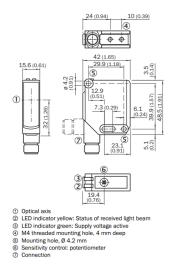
Dimensional drawing of the sensor WL12-3V2431 from the company SICK. Dimensions in mm (inch).
